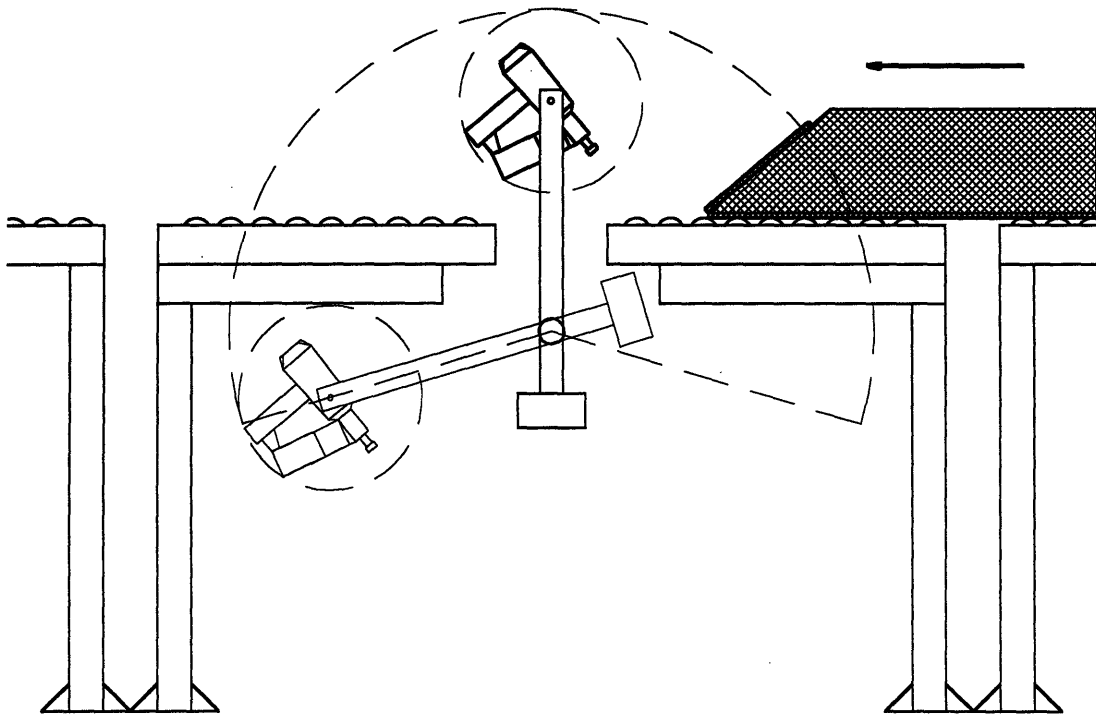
Side view of nailer and arm showing their workspaces and relation to the panel conveyor. The conveyor must be cantilevered as shown to allow the nailer to move between ribs.
